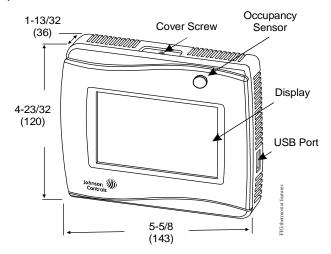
Thermostat Controller Shown with Occupancy Sensor, Dimensions, in. (mm)
